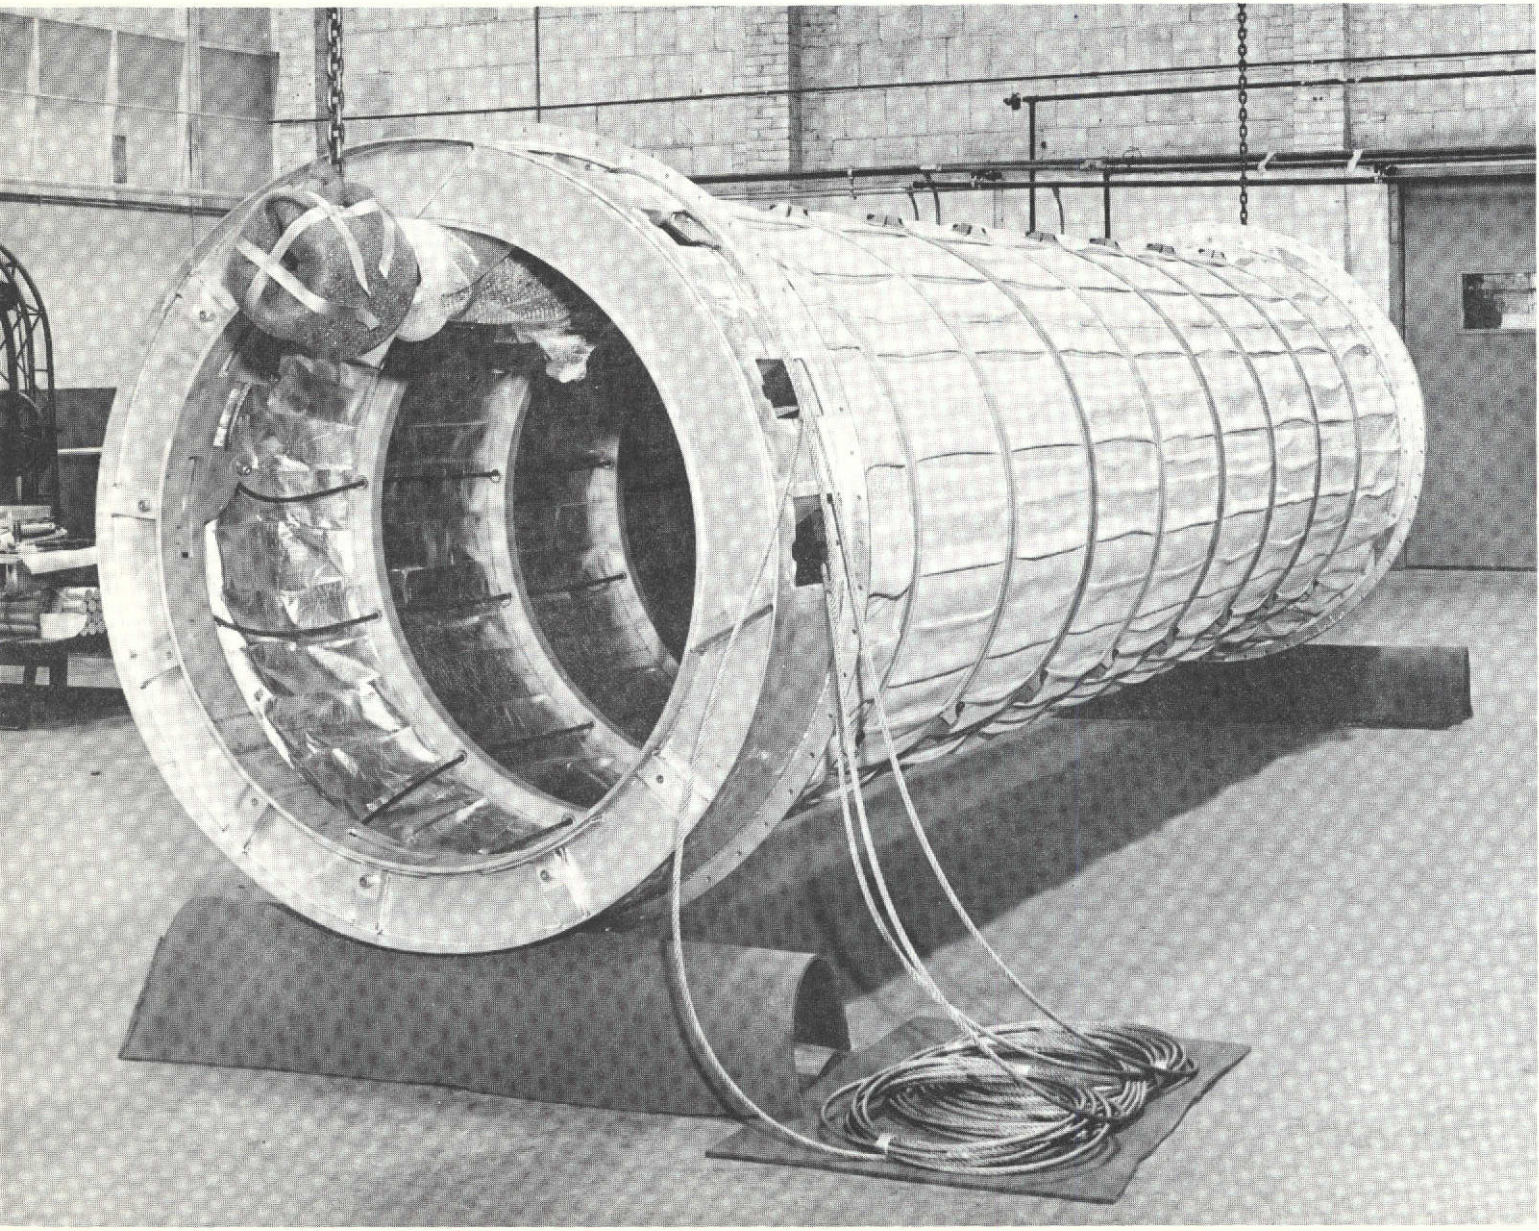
Tunnel with Structural Cylinder, Clamps and Cables Installed
